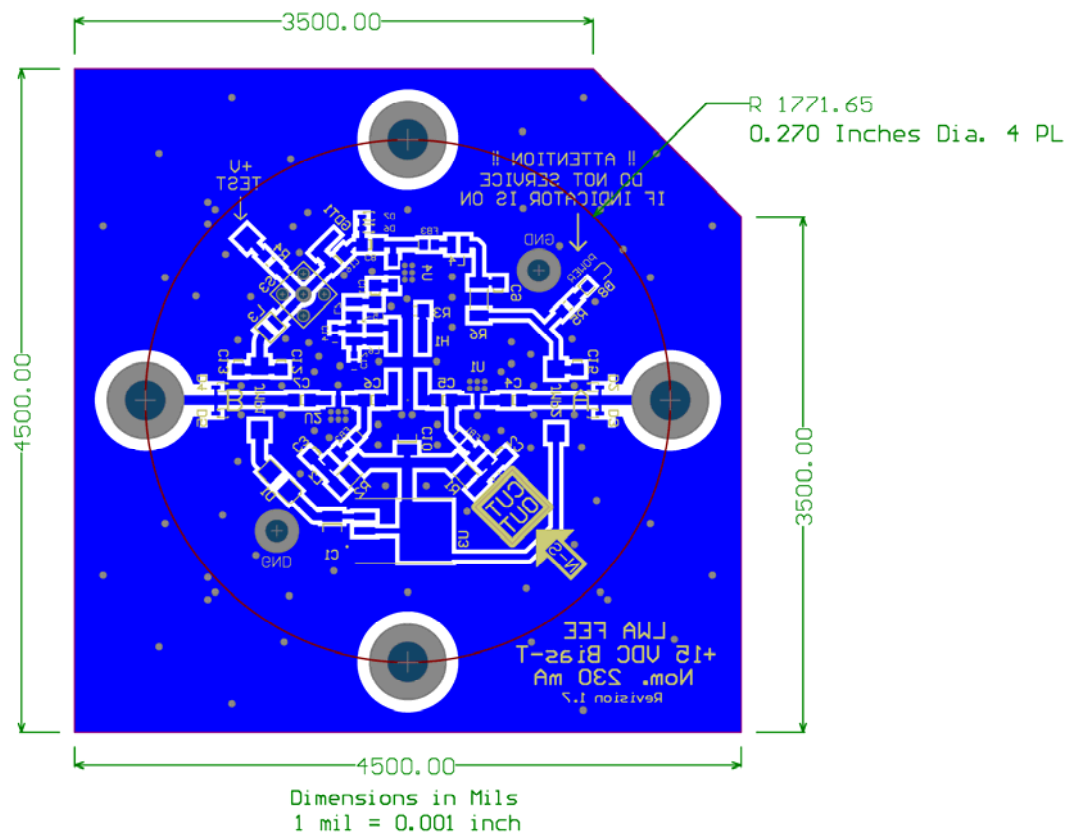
FEE PCB Layout: Component Side (Version 1.7)
